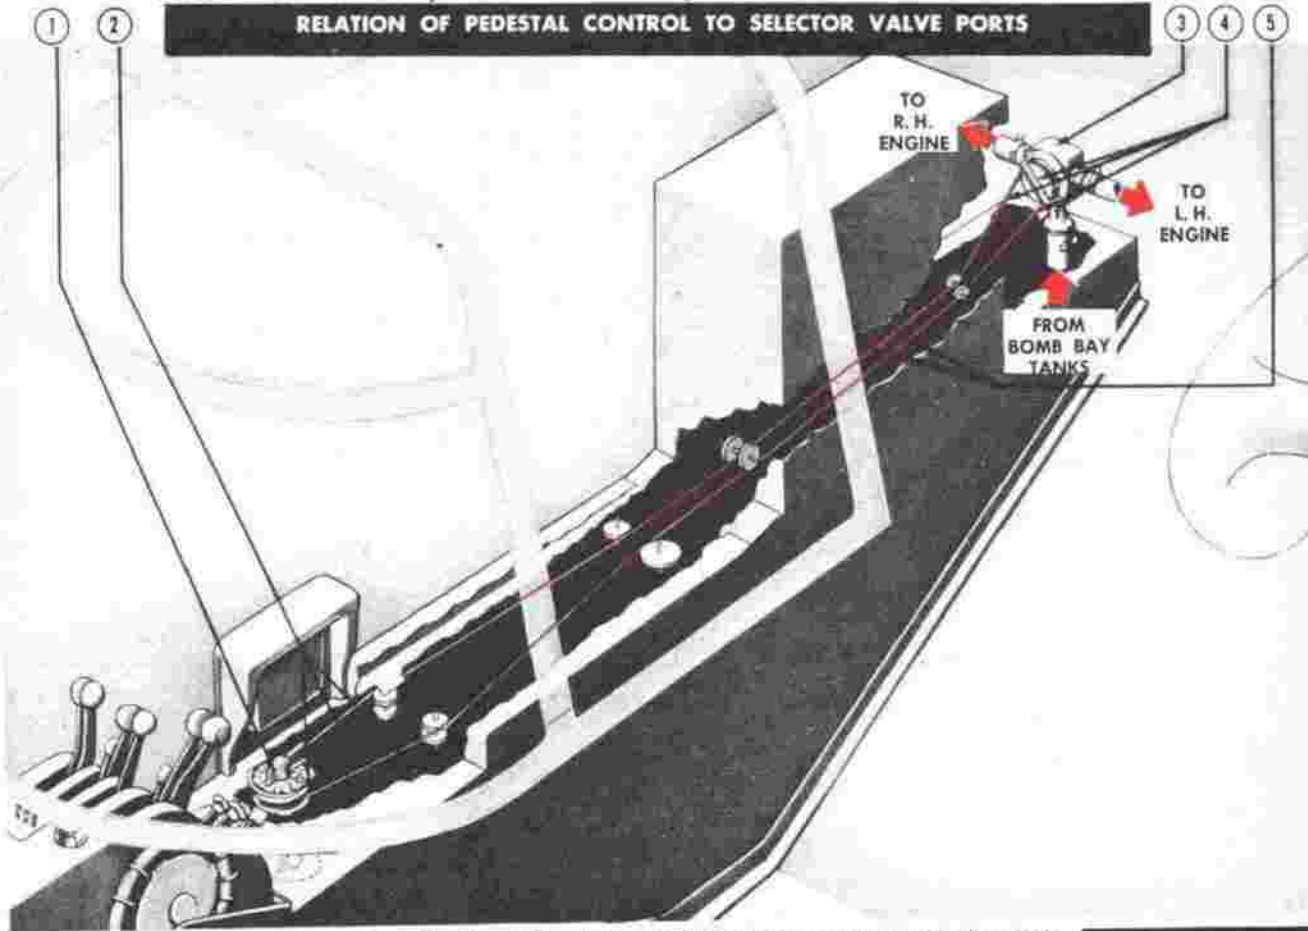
Cross Feed and Bomb Bay Tanks Selector Valve Cable Controls
